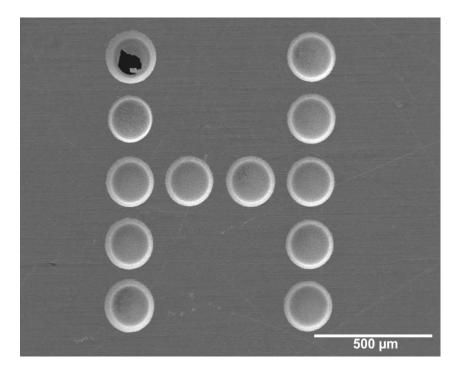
Machining of Letter "H" Using Blind Holes (Brass)
